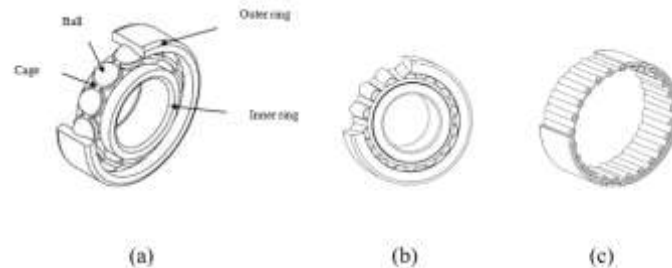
Bearing types (a) ball bearing (b) roller bearing (c) needle bearing (HOTAIT, 2020)
